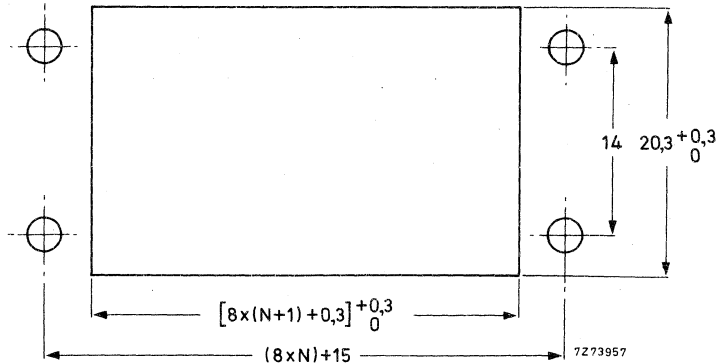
Panel cut-out for switches and end-pieces for mounting with four M3 screws.
